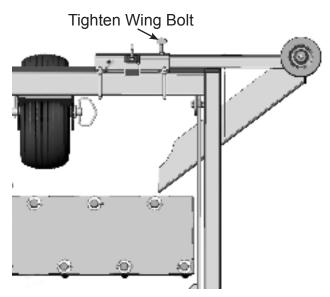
Model 1110 Bracket Attachment is installed with the U Bolts outside the wheel brackets as shown in the Figure above.
